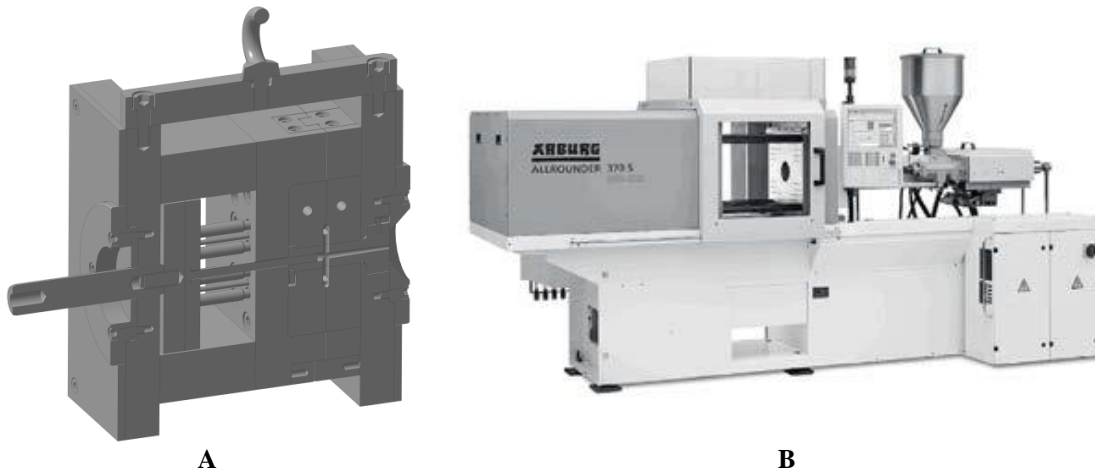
The mold model for injection molding (A) and the injection molding machine "Arburg Allrounder" (B).
